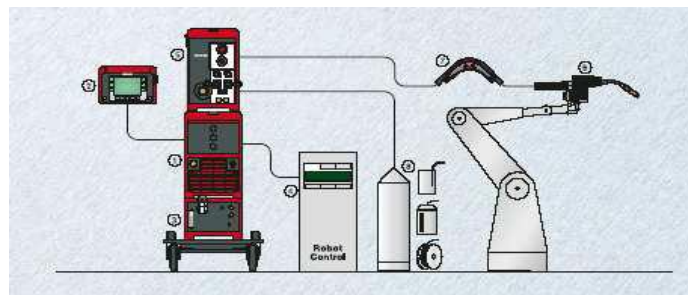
Configuration of robotic welding station with CMT unit. [4]
